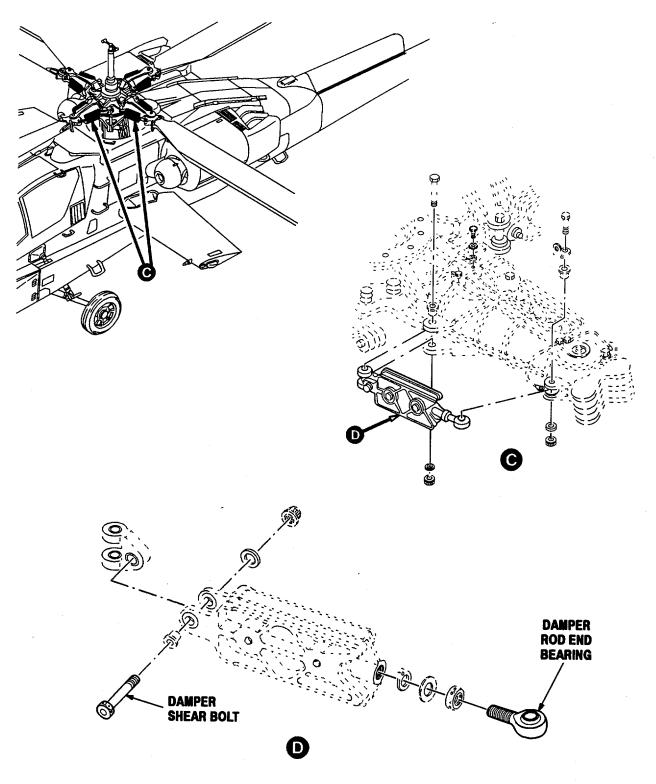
Main Rotor Subsystem Component Location (Sheet 3 of 6)
